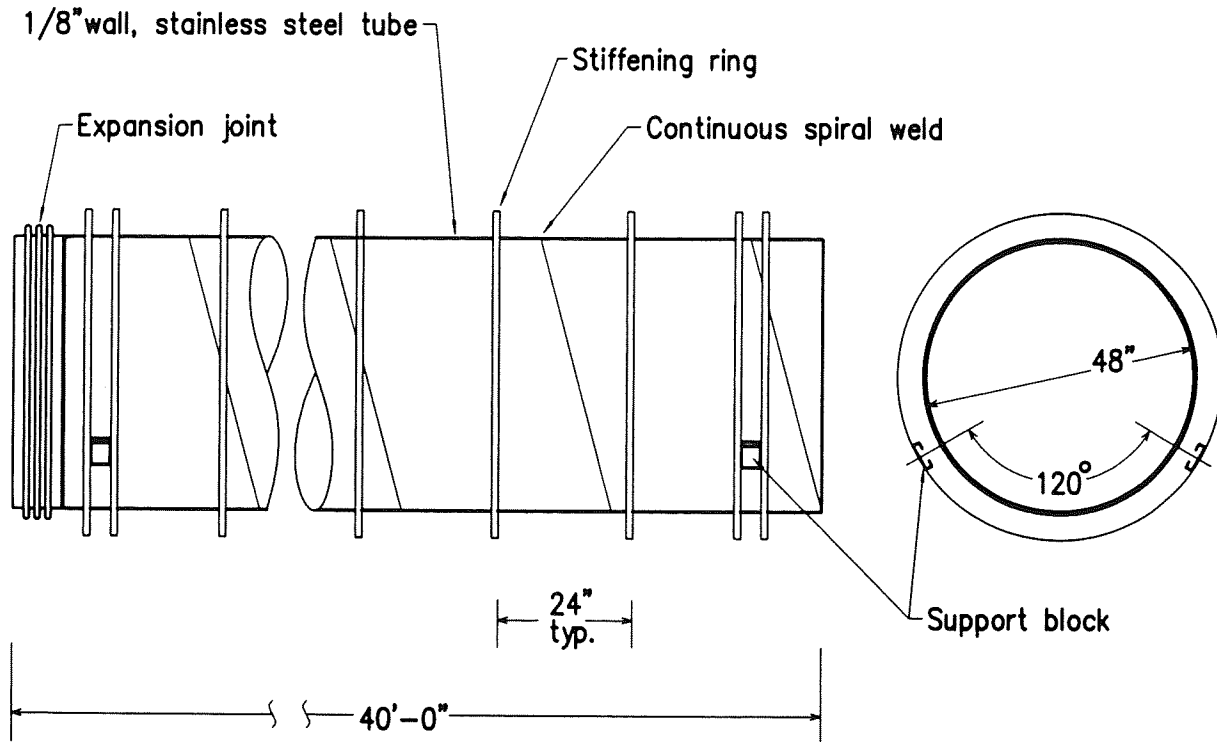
Principal features of a beam-tube section. *Left:* Side view showing single expansion joint, continuous spiral weld, stiffening rings and support block locations. *Right:* View along cylinder axis. To reduce stress on the thinwall tubing, the tube is held by support blocks mounted between two closely spaced stiffening rings.
